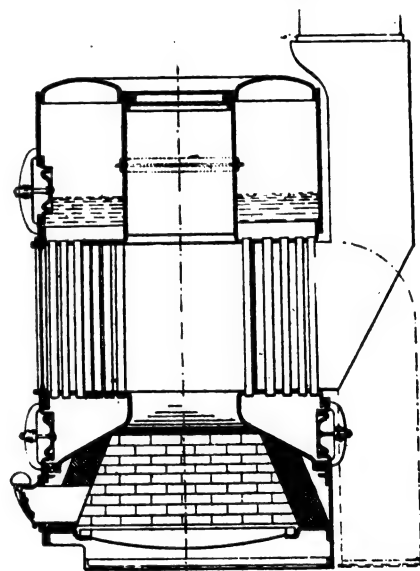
CUMMINS VERTICAL WATER-TUBE BOILER.
